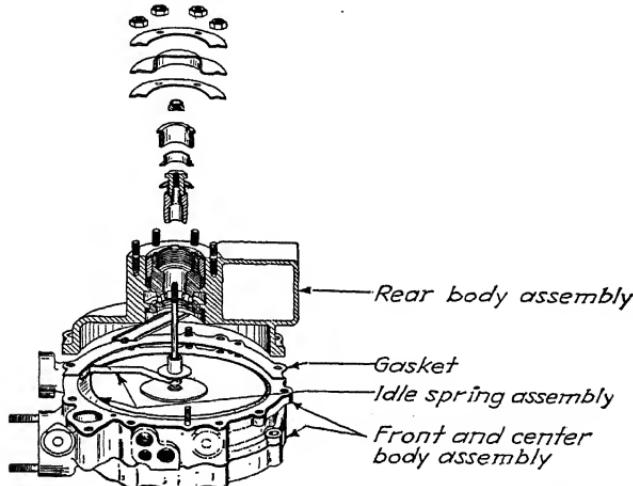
Regulator poppet valve disassembled—Stromberg.
